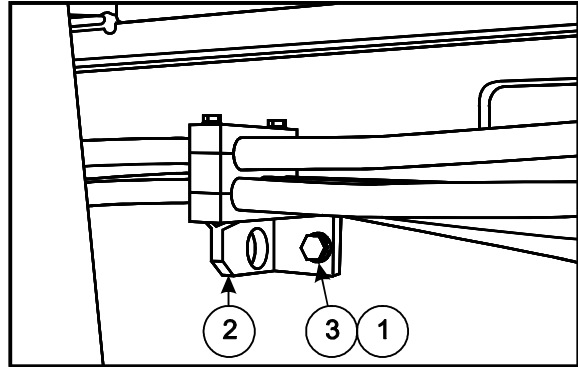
Hydraulic Tank Sub-Assembly, p/n: HY44-C
